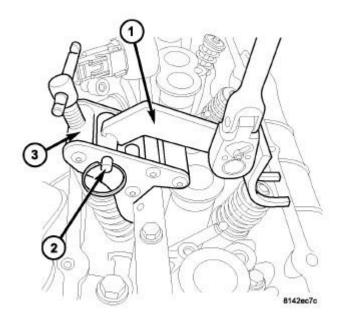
VALVE SPRING TOOL ADAPTER Courtesy of CHRYSLER LLC
